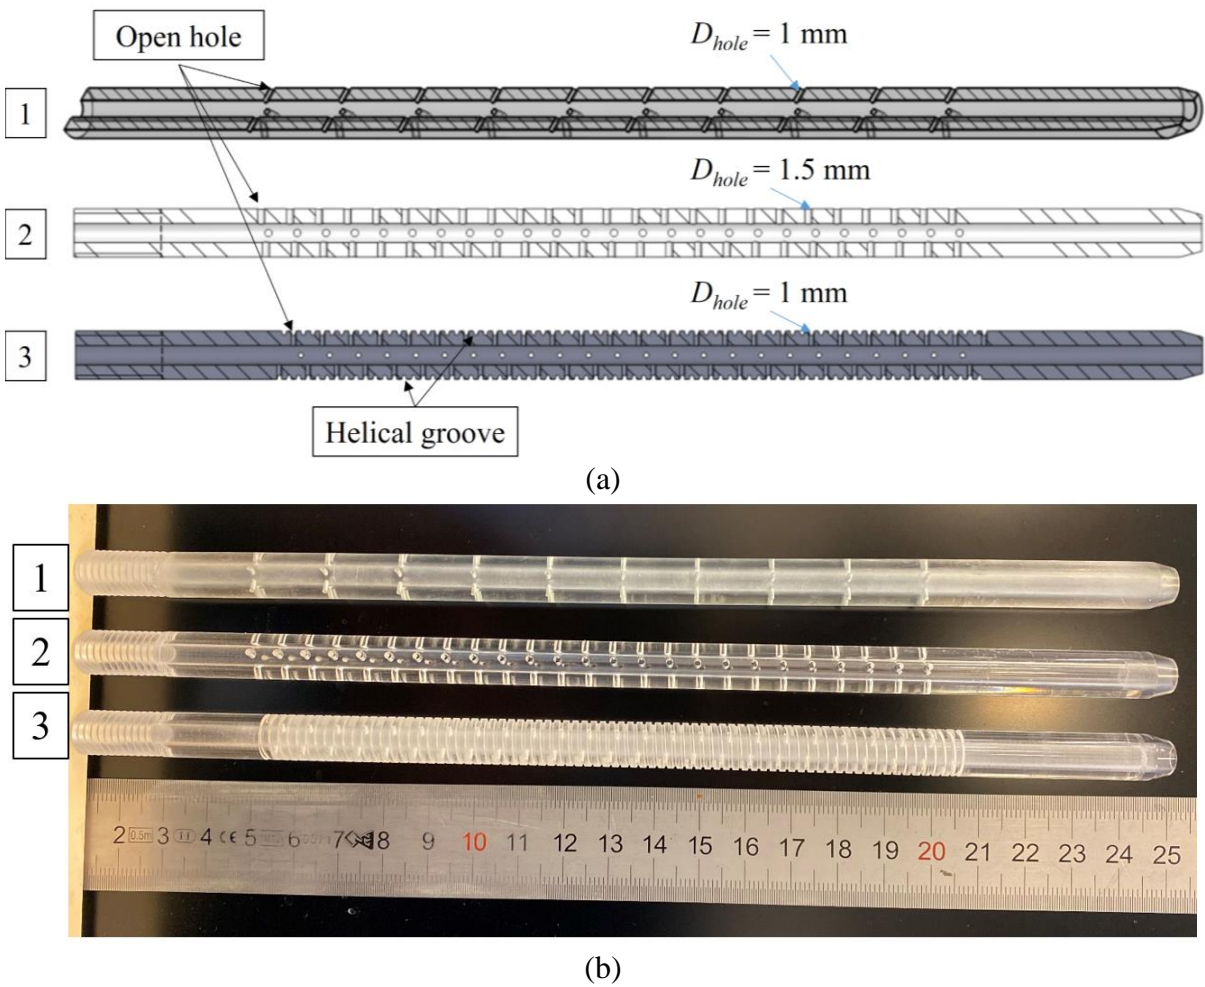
Different configurations of the injection tube testing: (a) 2D design view; (b) photo of the tubes.
